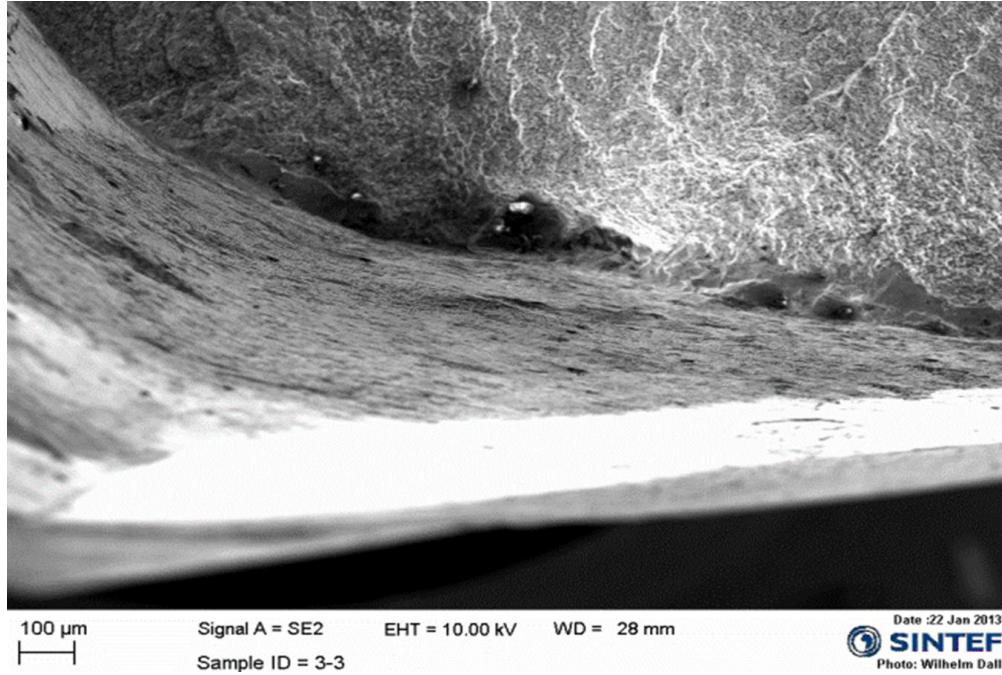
Enlarged section of Figure 19. Location of fatigue crack initiation.
